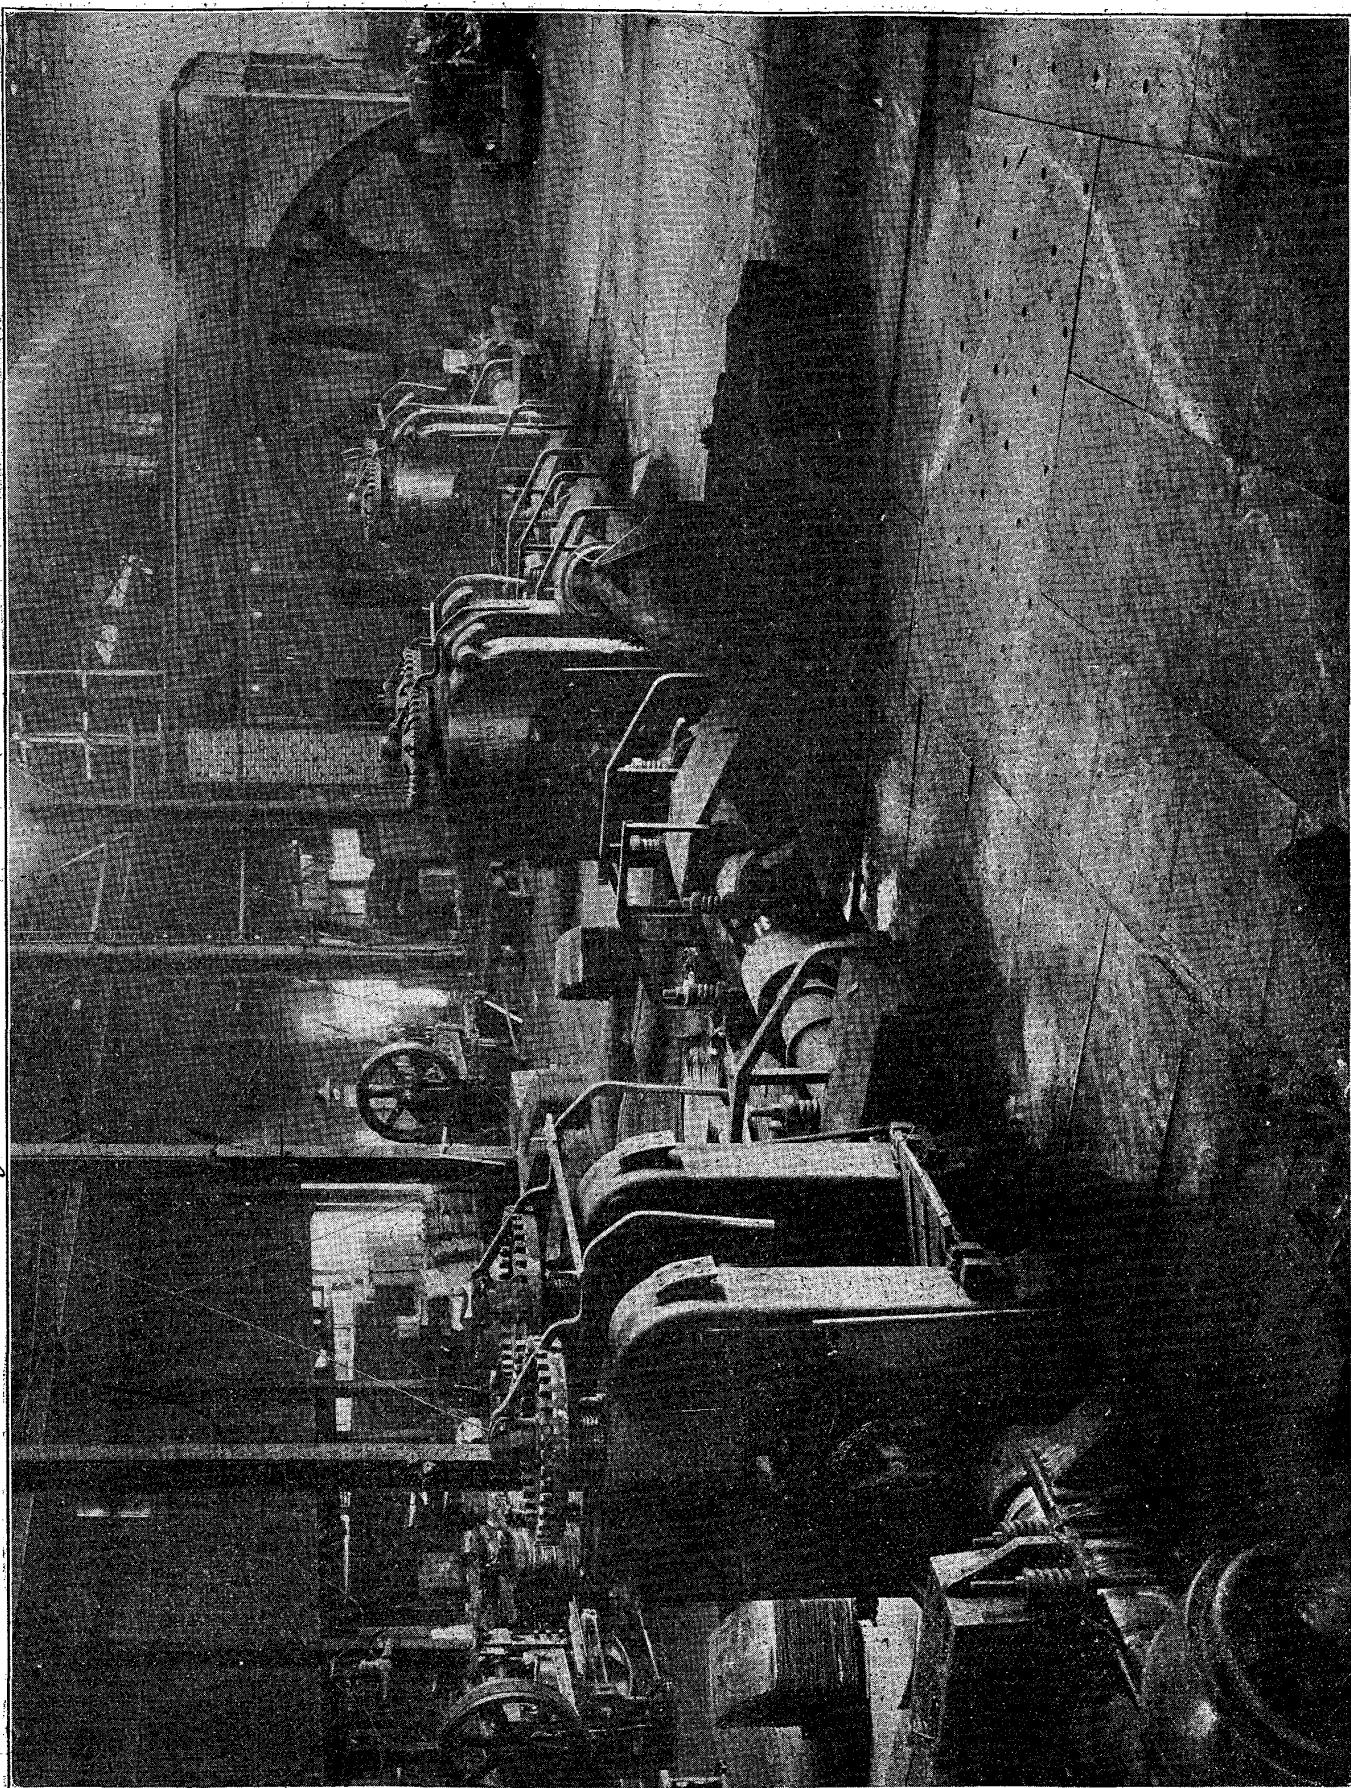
<sup>4</sup> Cutter rolls of tin plate mill plant.
